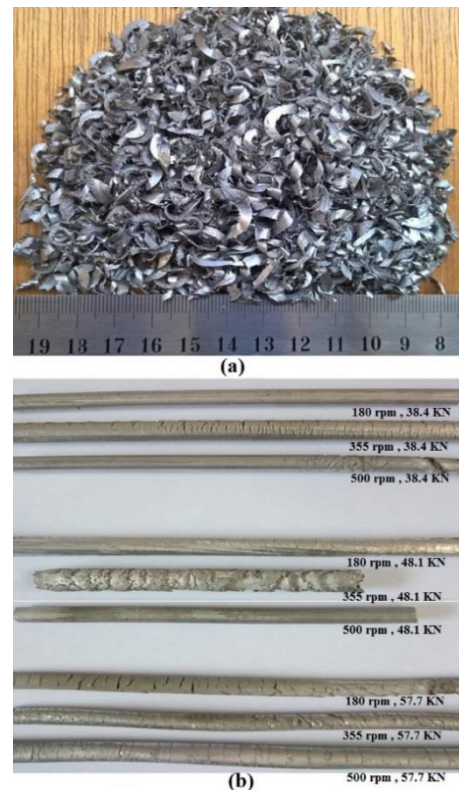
a) Chips of aluminum AA7022 b) extruded specimens
